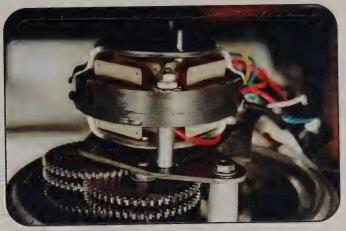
Turn the upper spur gear to move the ring gear (see step 31).
